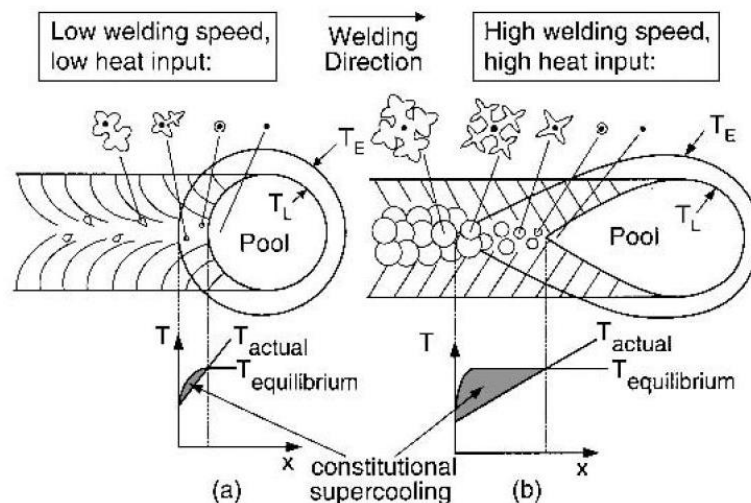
Weld speed and constitutional supercooling effect on the weld microstructure. a) Low welding speed. b) High welding speed [21].
